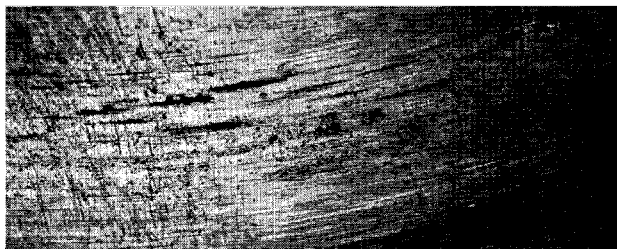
10X magnified view showing appearance of area cracked due to abnormal loading imposed on the propeller flange during periods of unauthorized maneuvers.
